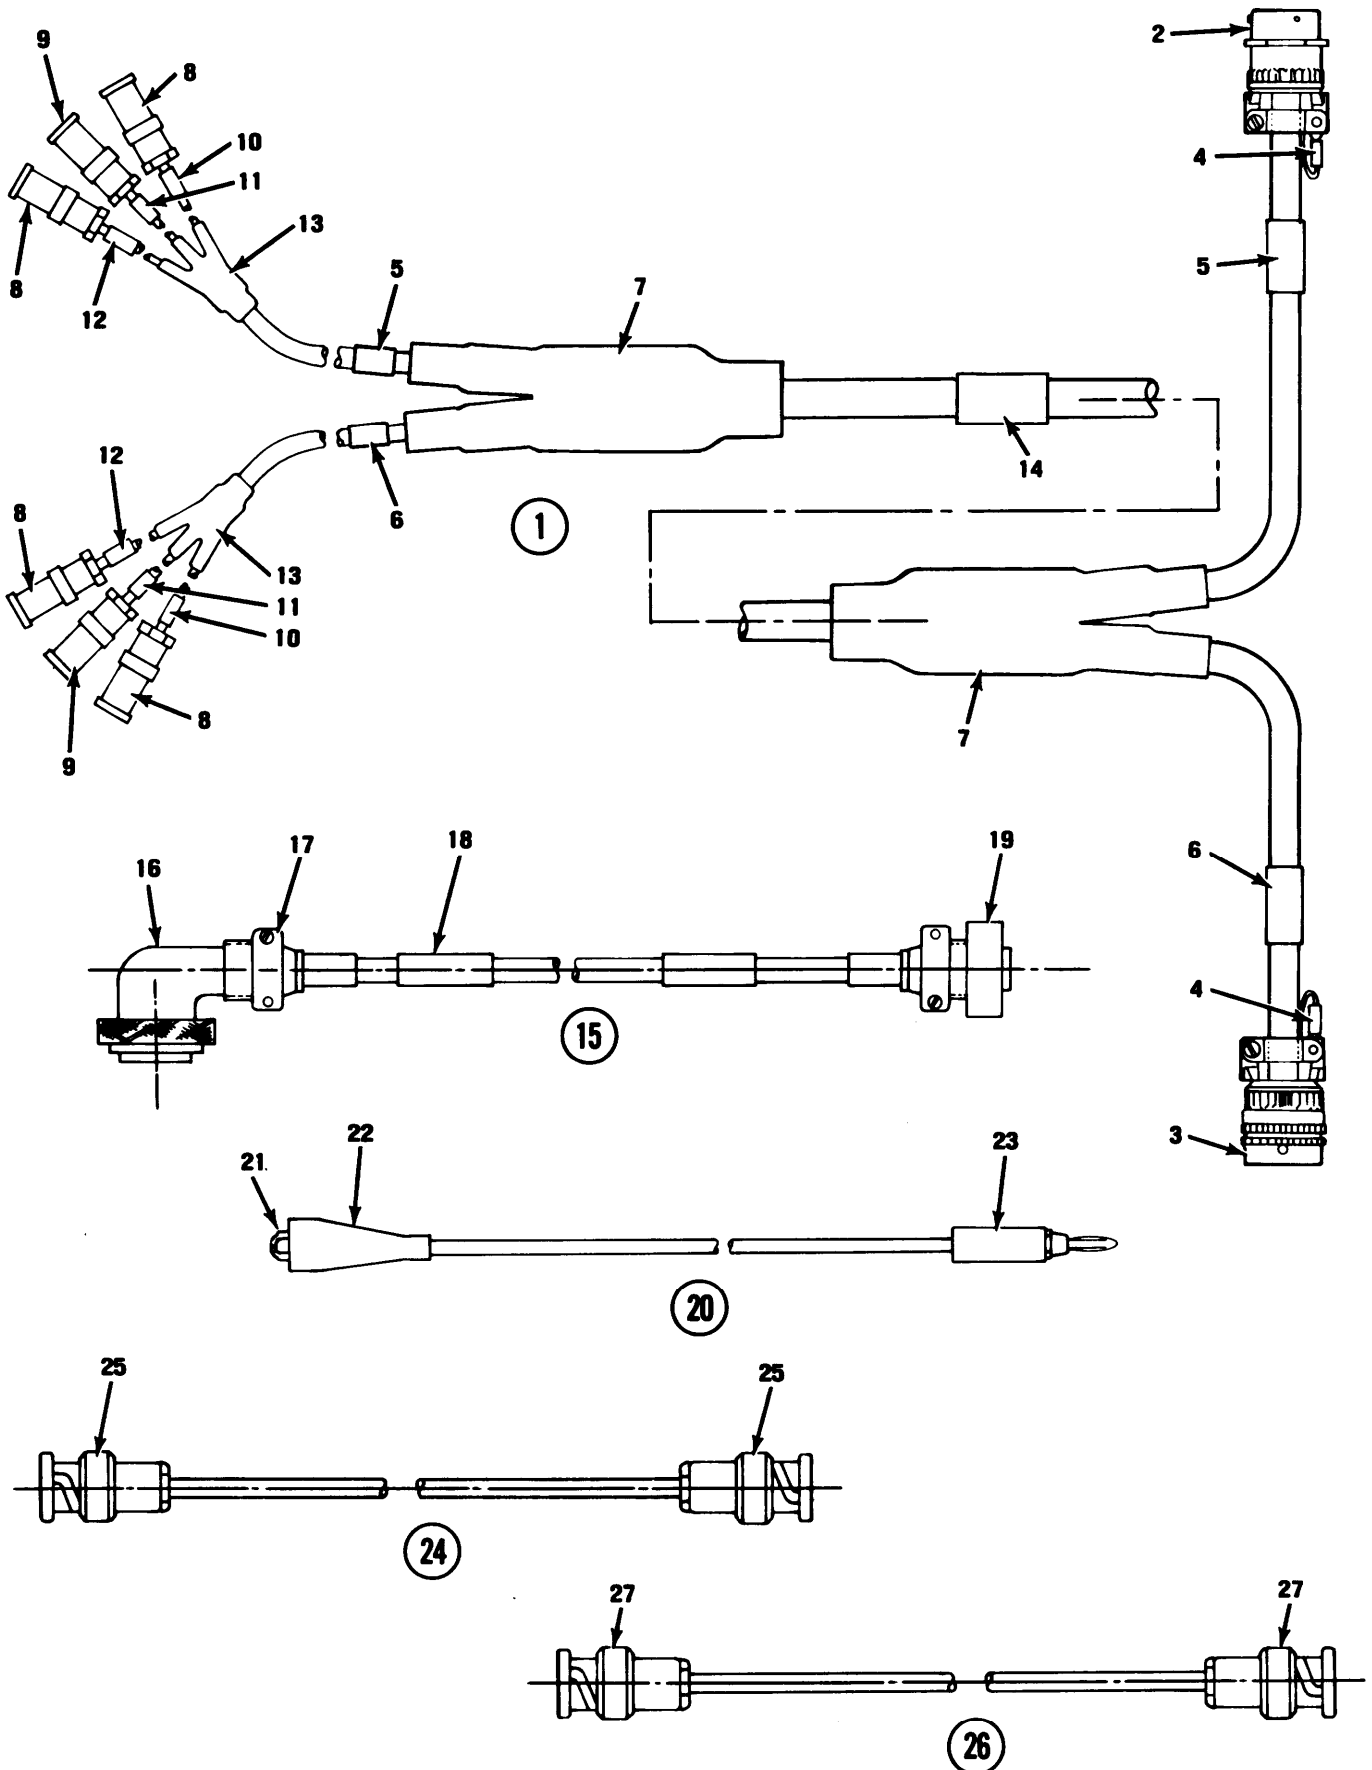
Cables, Adapter Cables and Accessories (Sheet 1 of 3)
